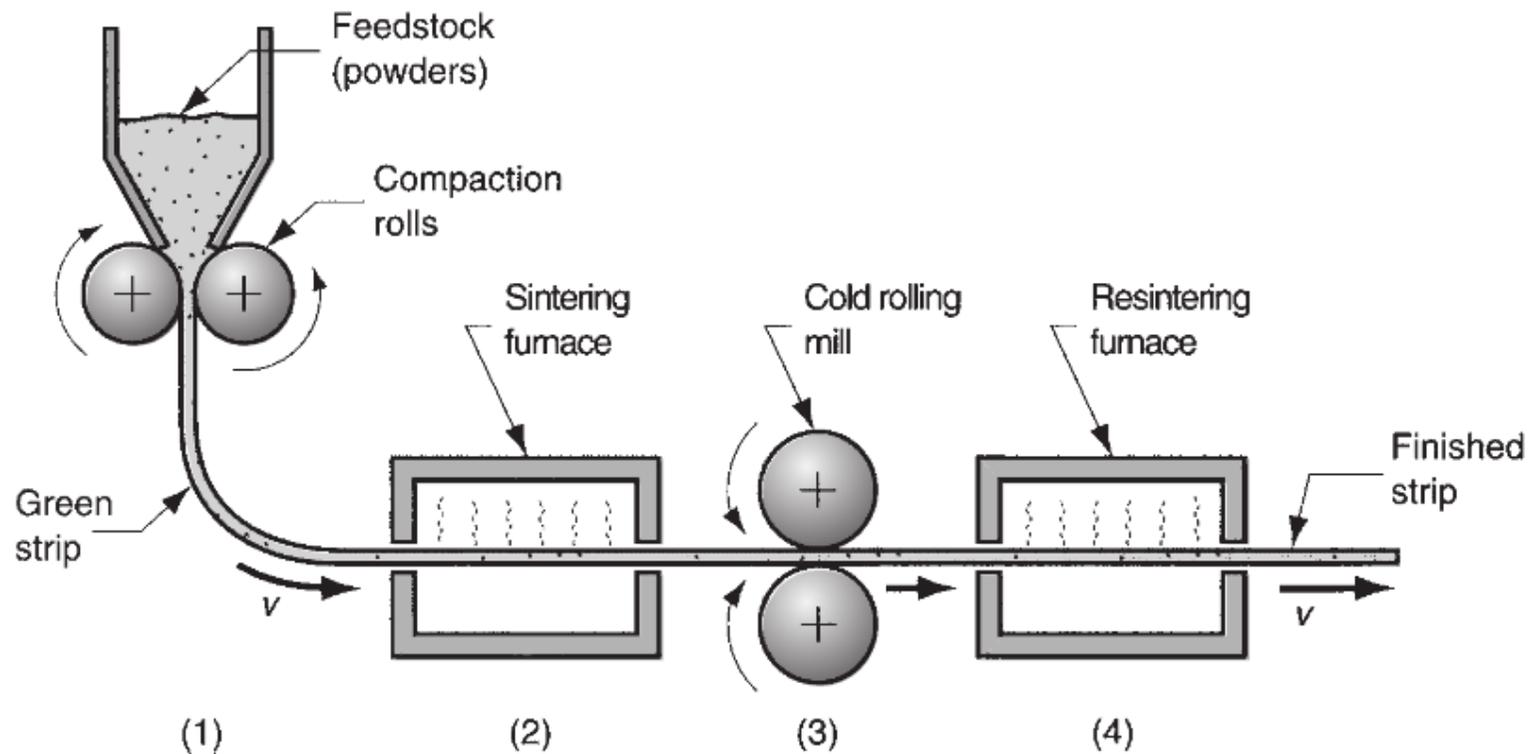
Powder rolling: (1) powders are fed through compaction rolls to form a green strip; (2) sintering; (3) cold rolling; and (4) resintering.
